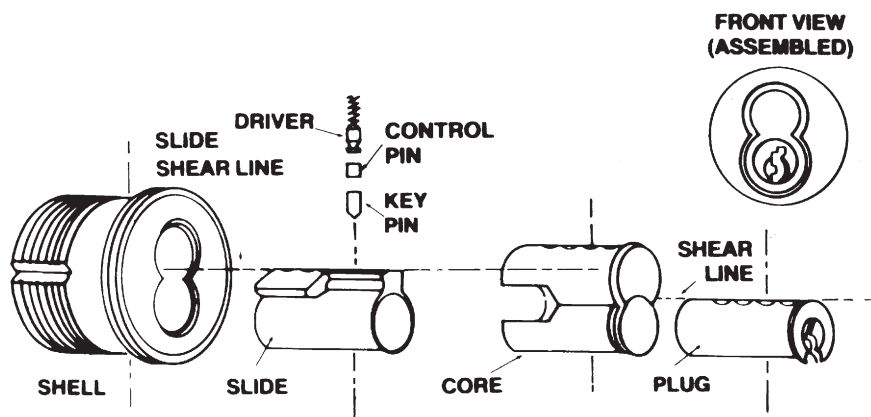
Removable core, pin tumbler, cylinder mechanism.
